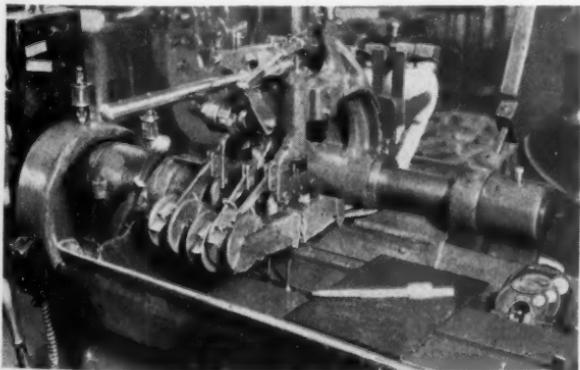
Shafts are lapped in this Schraner lapping machine. Strips of abrasive cloth, fed automatically, are employed as the lapping medium.
